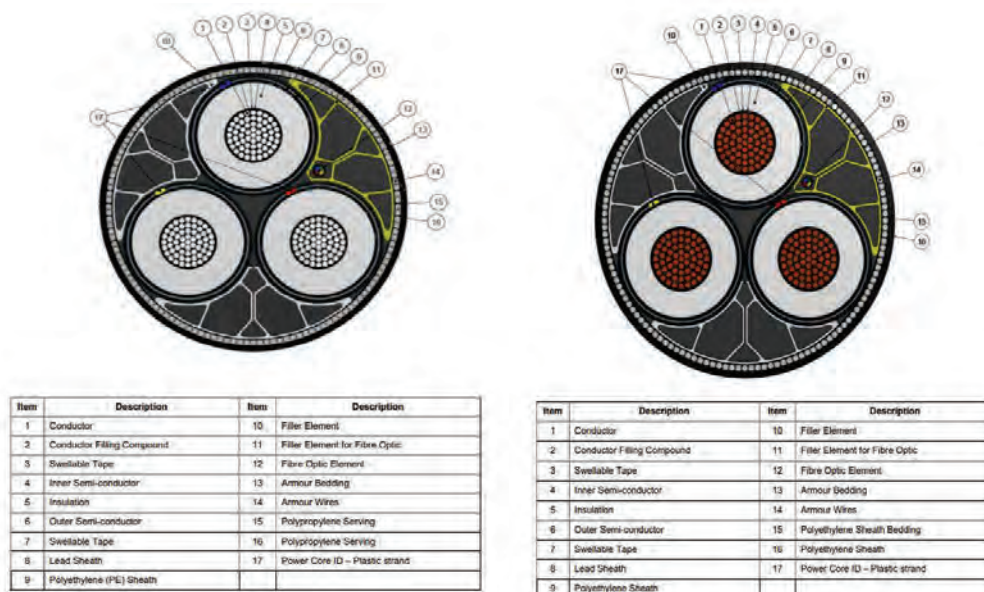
Examples of cross sections of aluminium and copper core subsea cables
